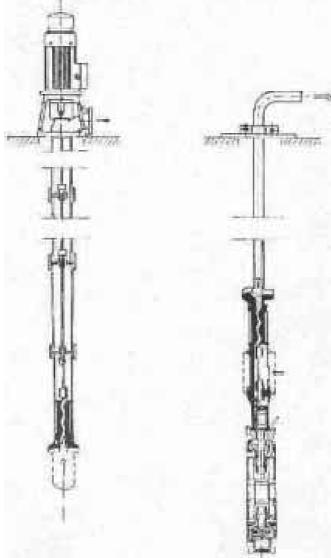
Pump connected to a groundlevel motor by a rod assembly Close-coupled in-well pump set (pump + motor)
